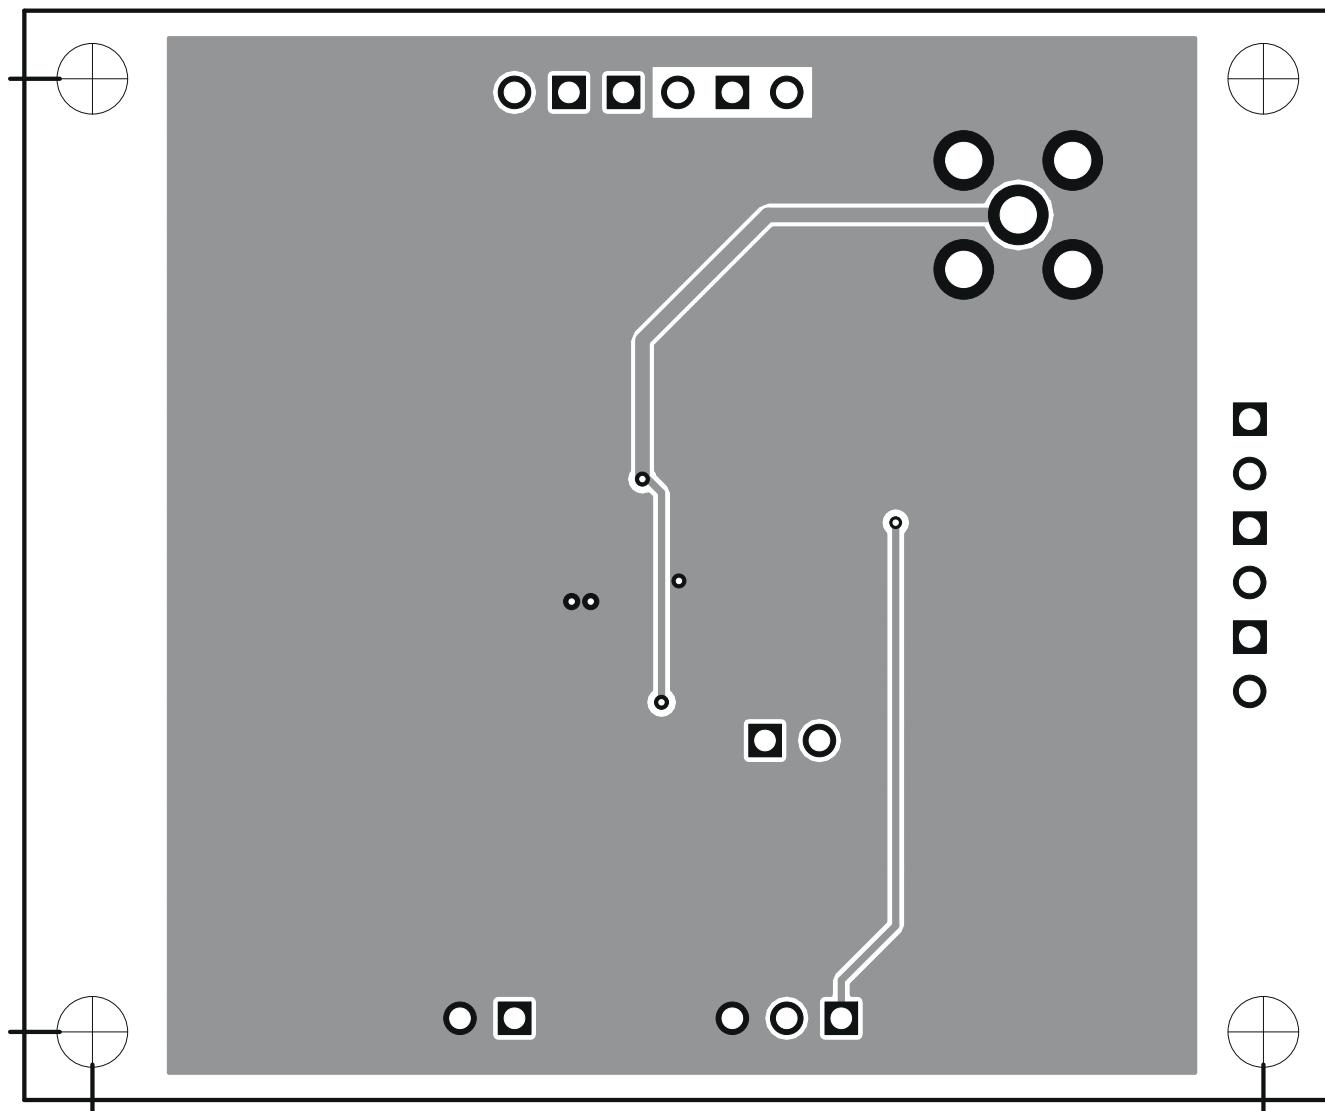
TPS62120EVM Bottom-Side Copper (Bottom View)
